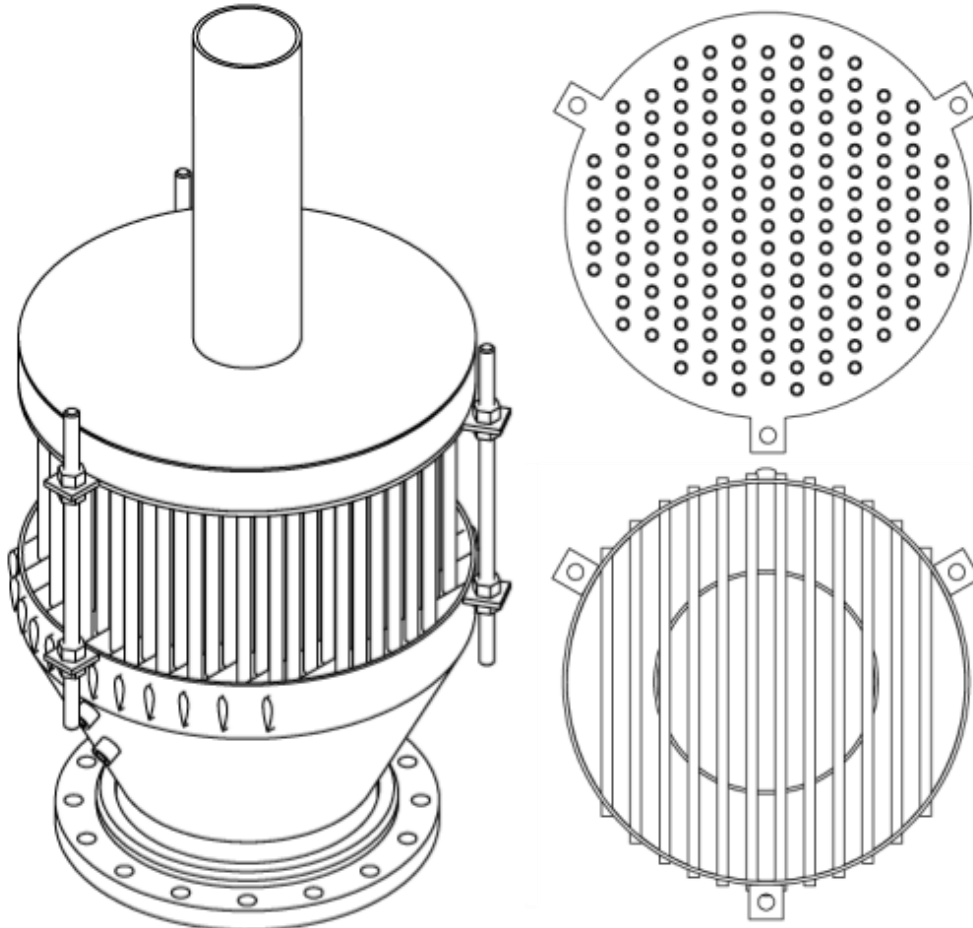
Isometric view of mixing head assembly (LHS). Cross sections of hydroplanes and inlet pipes. The open ends of the inlet pipes are positioned in the space remaining between the individual hydrofoils.
